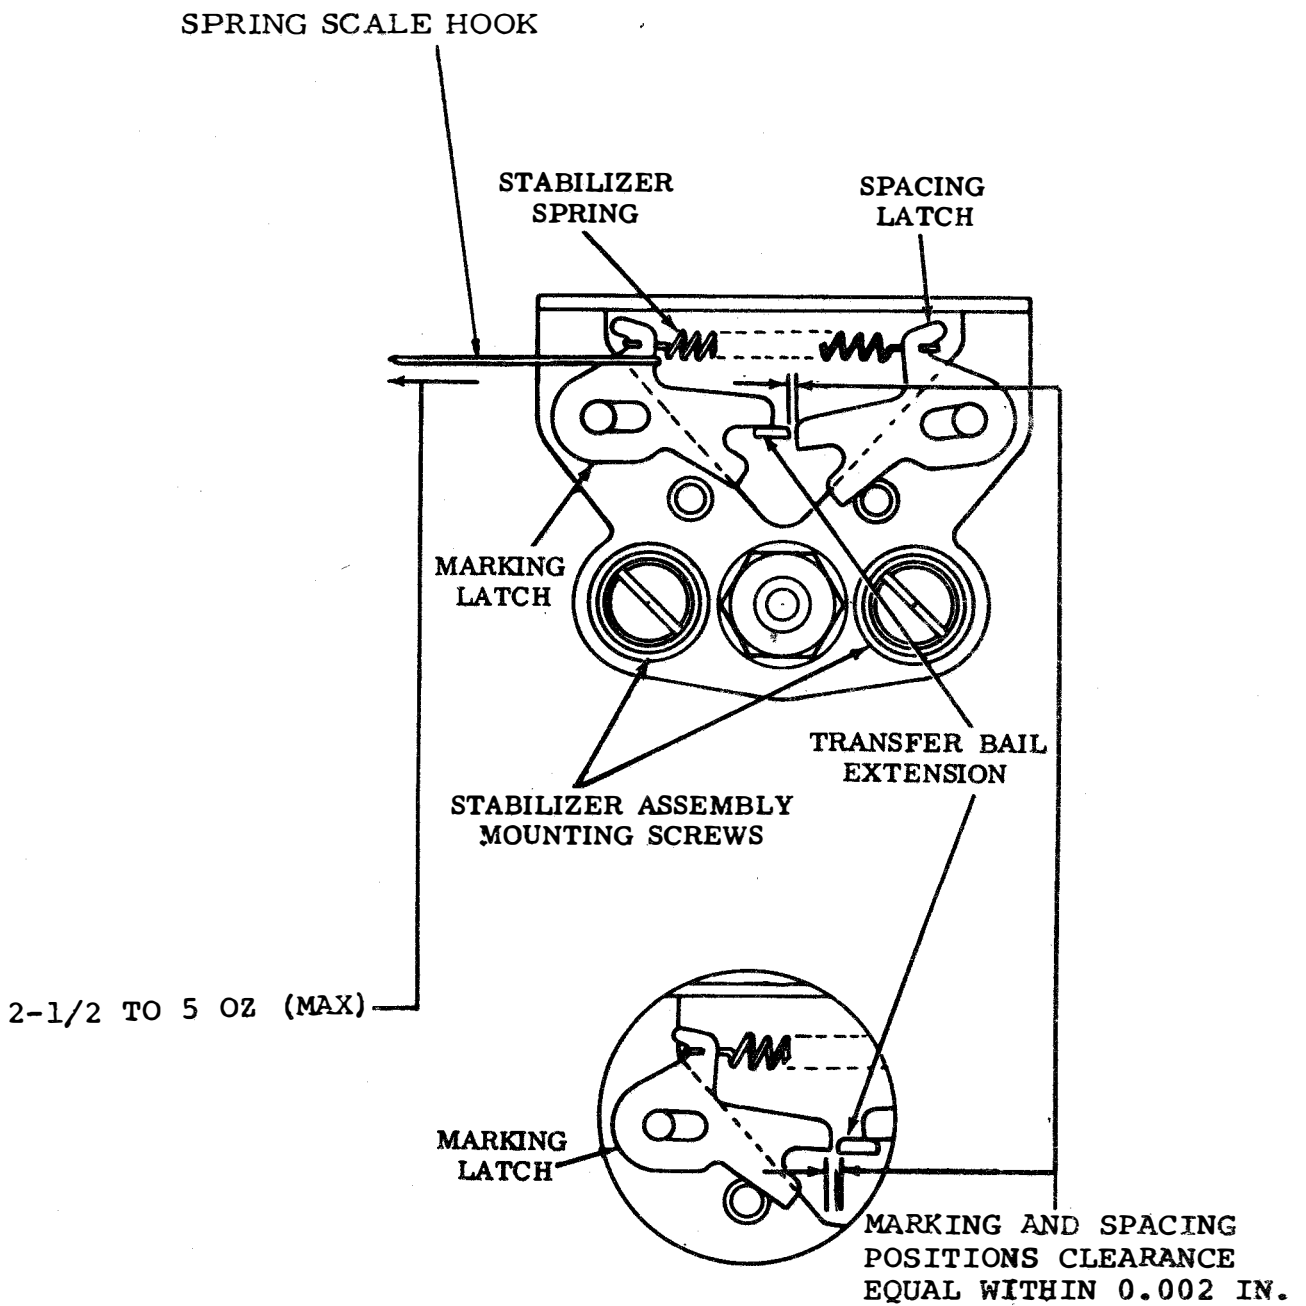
Transfer Bail Stabilizer and Stabilizer Spring, Front View
